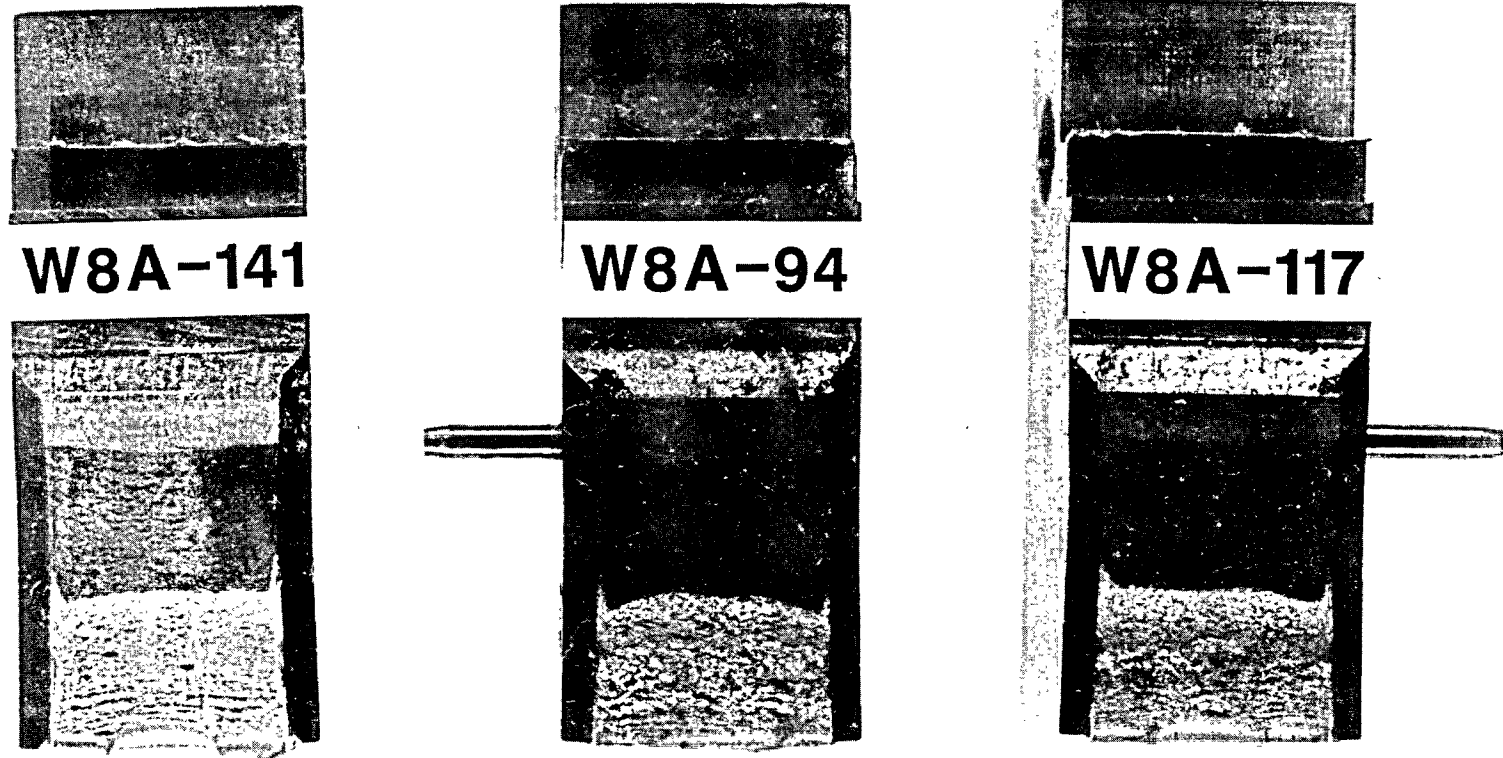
Fracture surfaces for the δ_5 check-out tests using a Linde 80 weld. The smooth fracture surfaces are in contrast to those for the A 302-B plate in Fig. 18.
